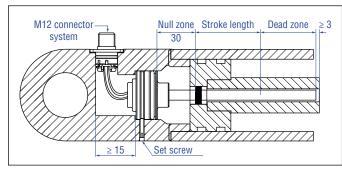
Example of In-Cylinder assembly with M12 connector system
